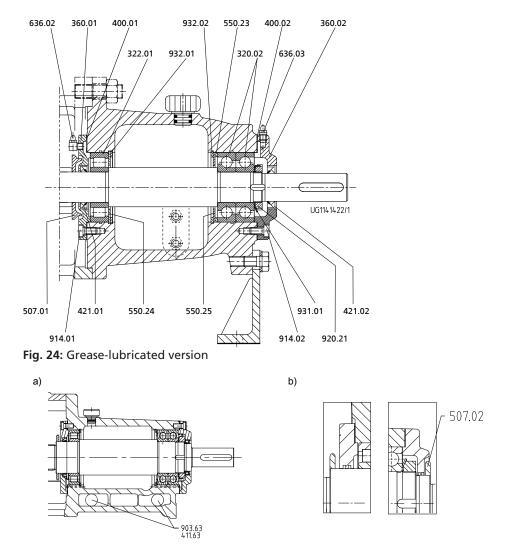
a) Version with coolable bearing bracket, b) Version with labyrinth seal
